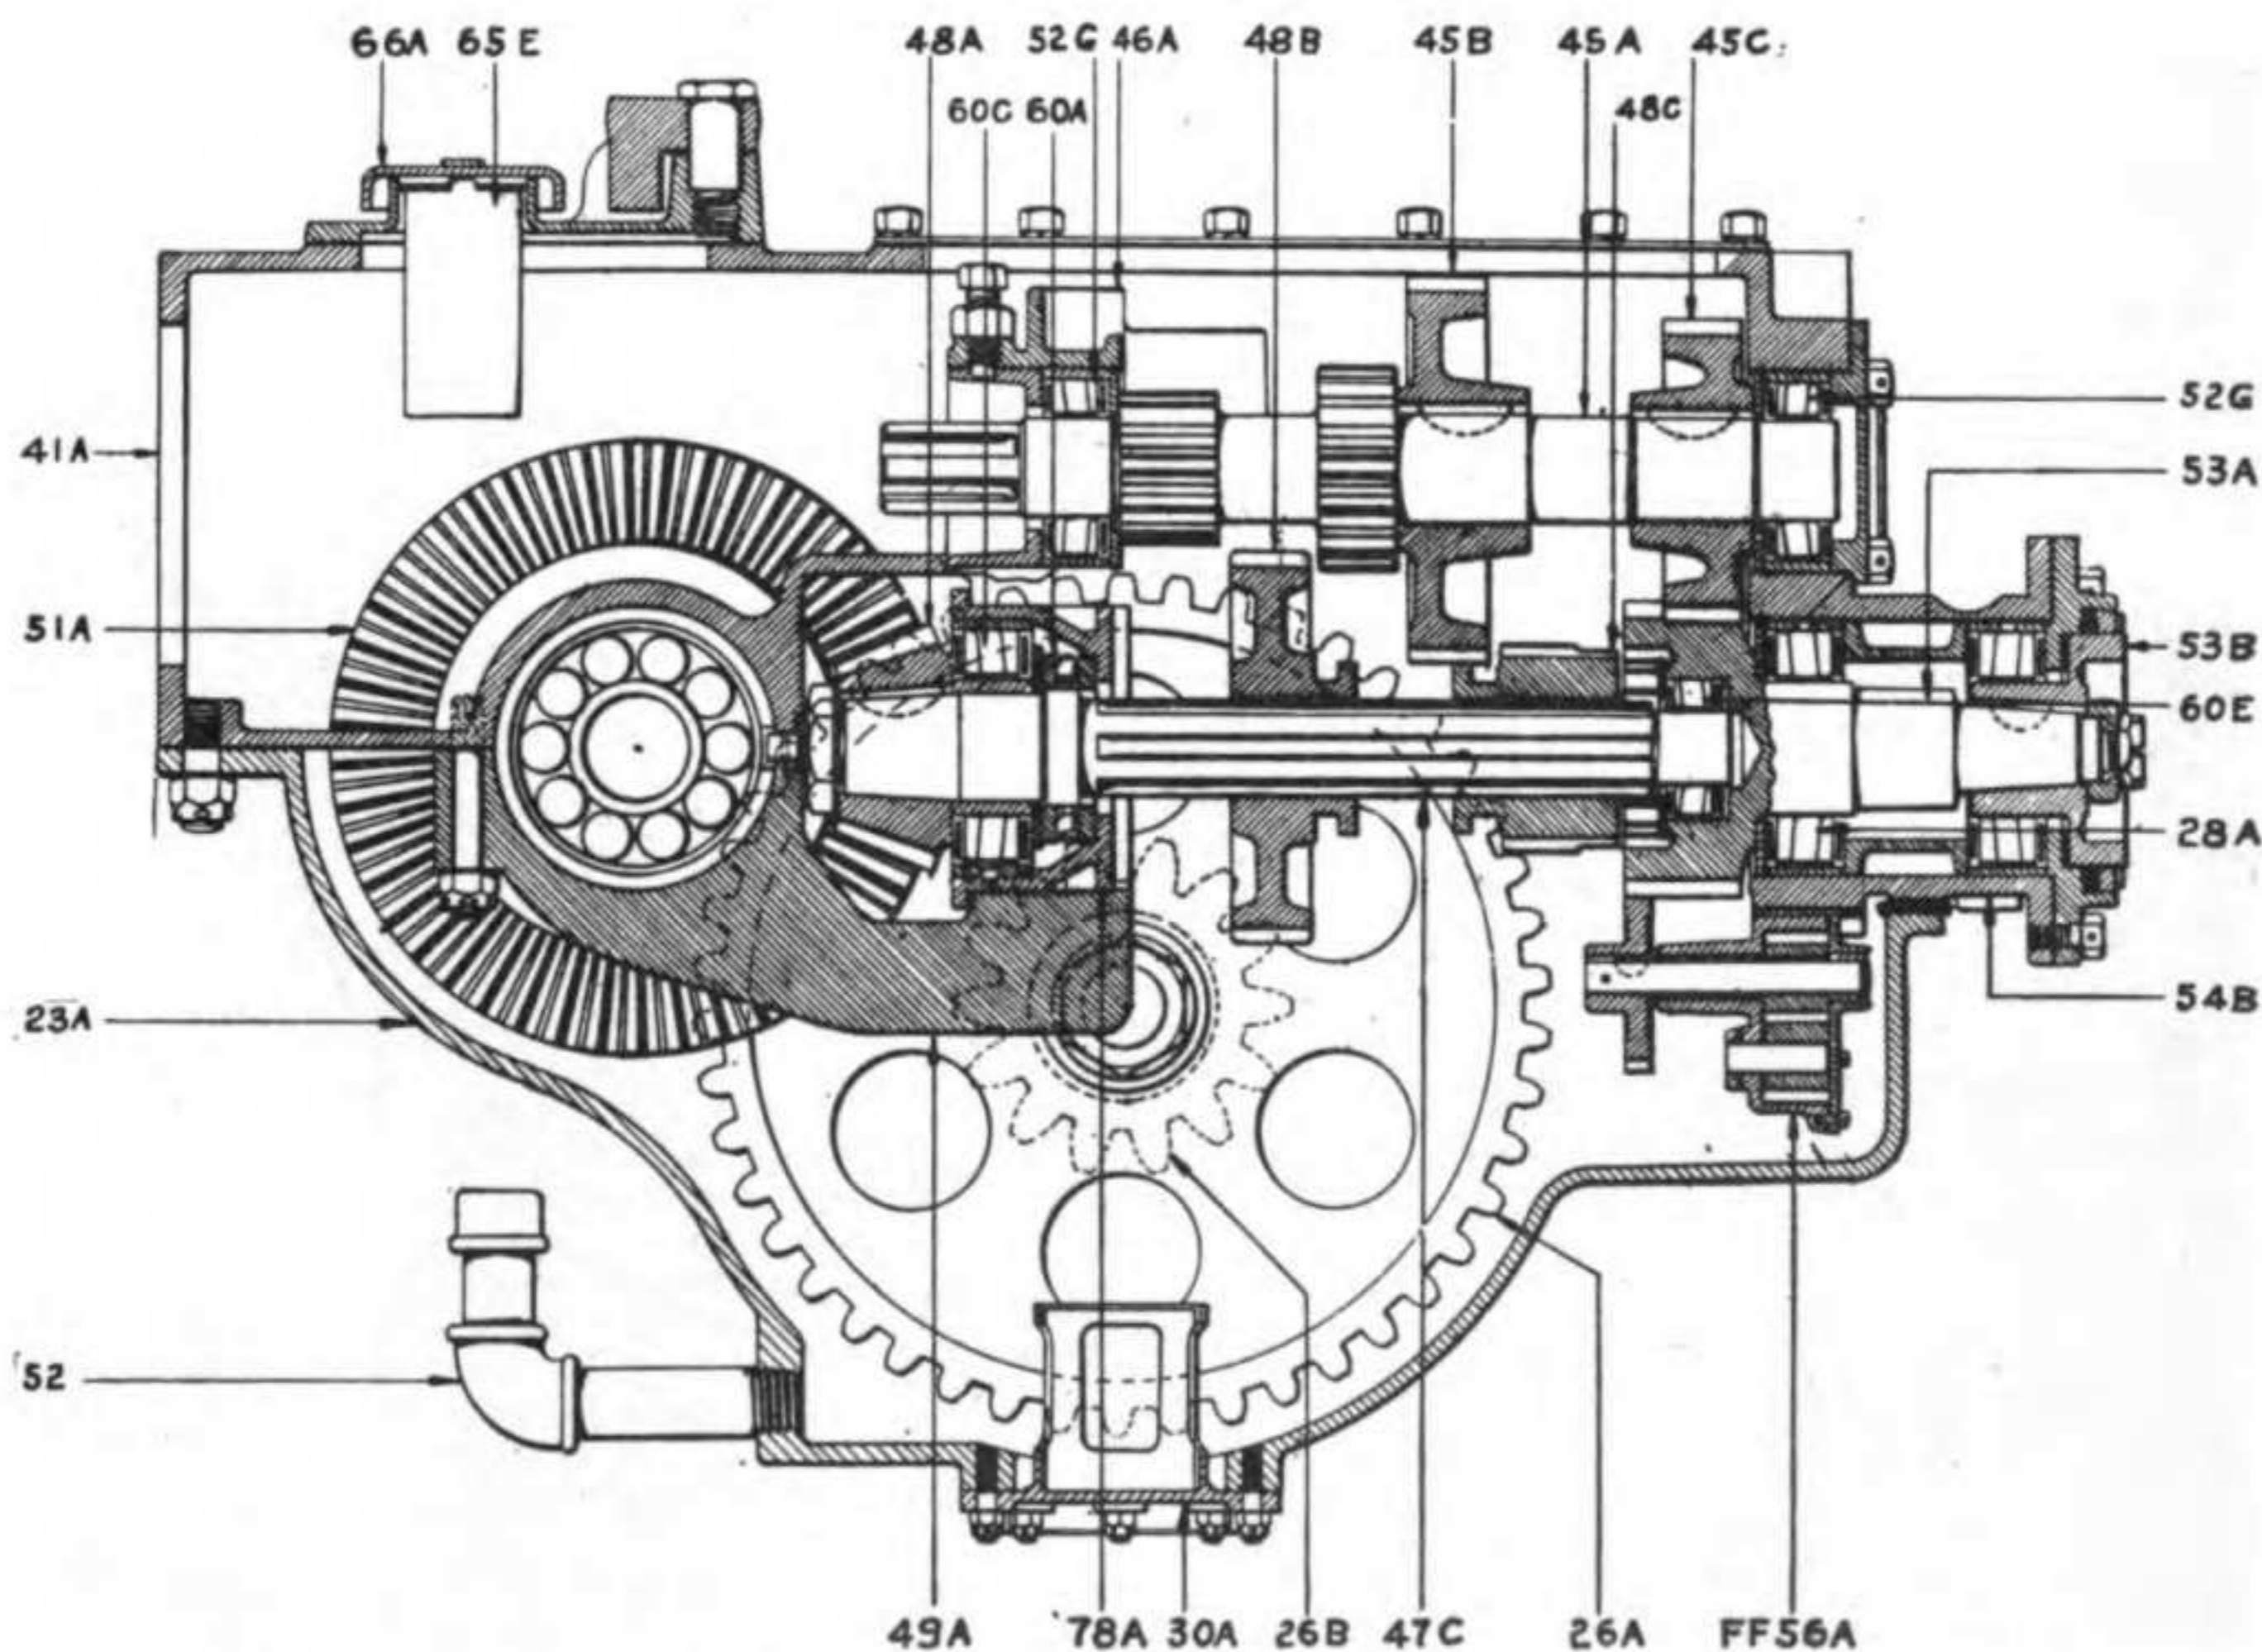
SECTIONAL DRAWING OF TRANSMISSION
